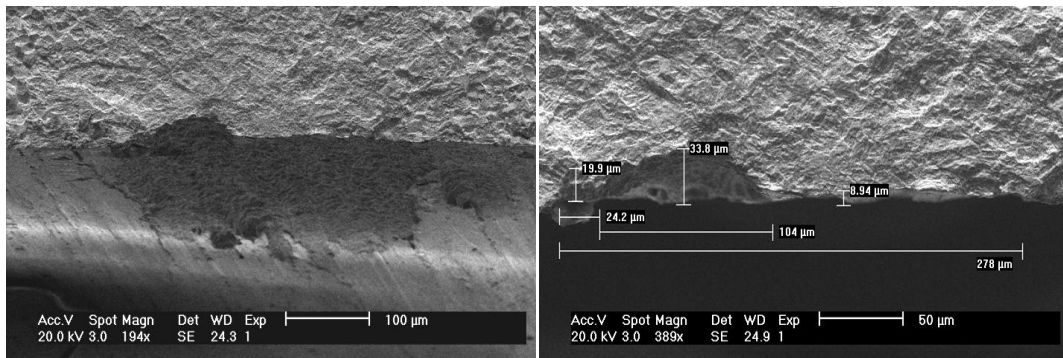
Different views of the fracture surface of the flaw where the fatigue crack initiated
